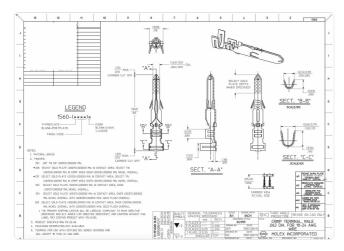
Technical Drawing of Male Crimp Terminal. This diagram illustrates the precise dimensions and design of the male Molex Series 1189 terminal, showing its crimp sections and pin structure.
